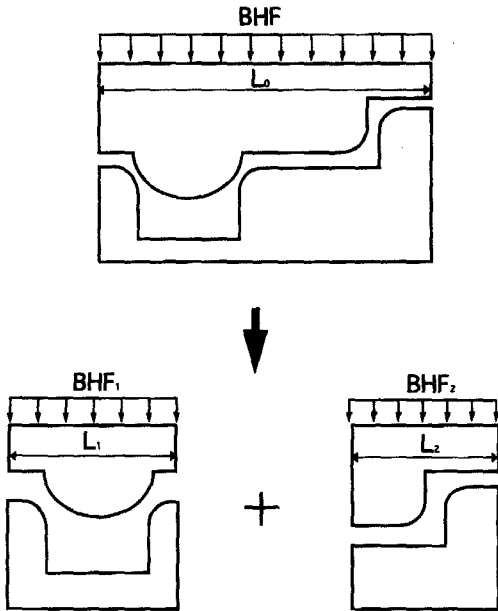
Partition of a circular-stepped drawbead into a single circular drawbead and a stepped drawbead
